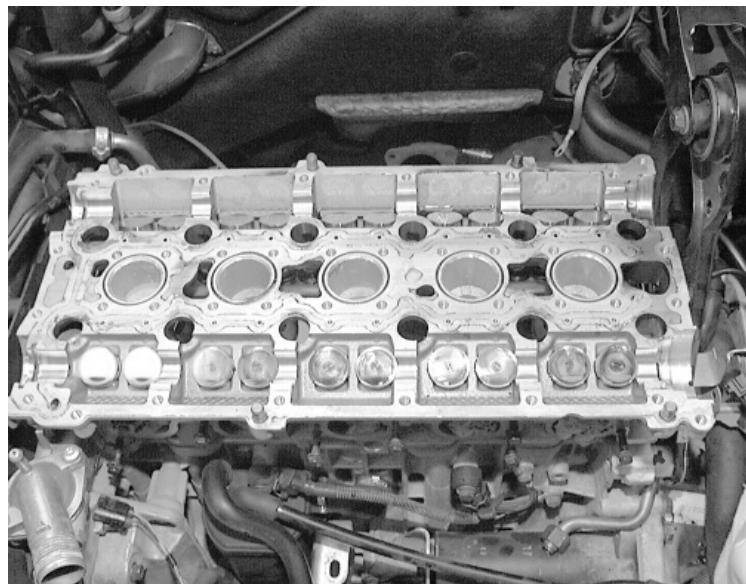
Remove camshafts to access the cylinder head bolts
